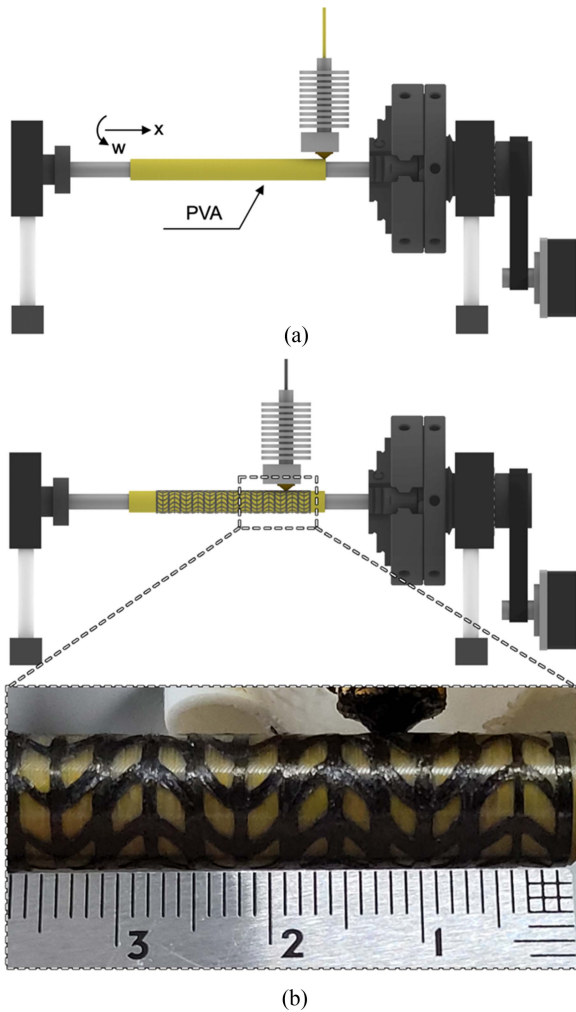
(a) PVA coating on mandrel surface. (b) Additive-lathe printing of stent on PVA-coated mandrel
